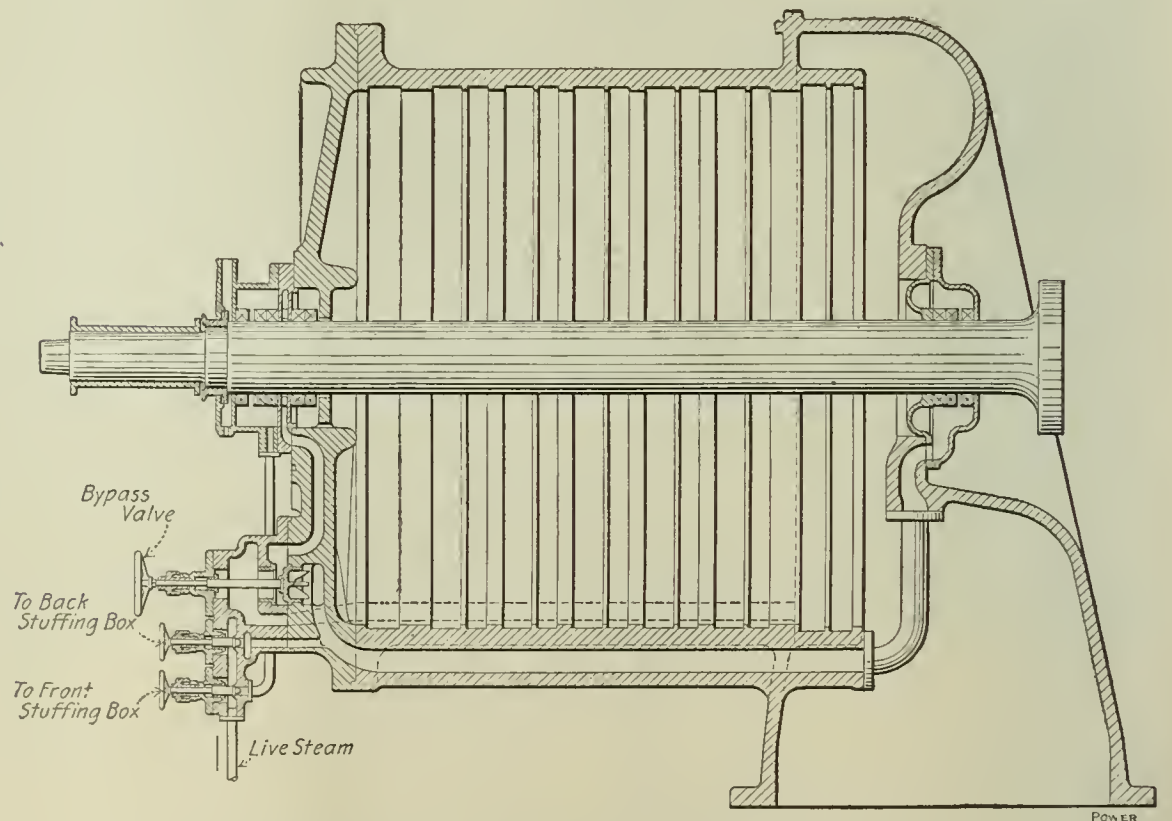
SECTIONAL VIEW OF TURBINE, SHOWING LABYRINTH PACKING
